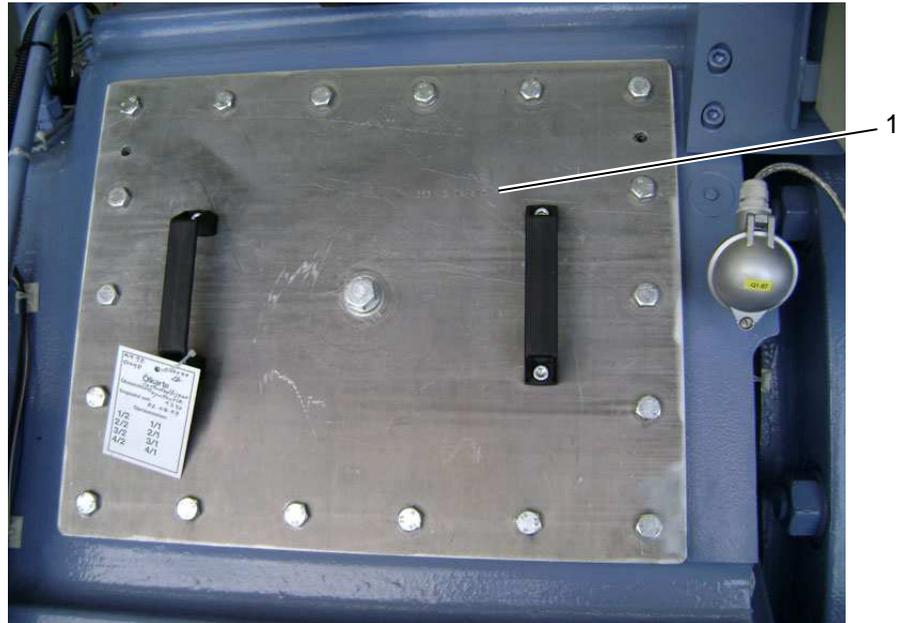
1E Inspection cover (manufacturer Winergy)
